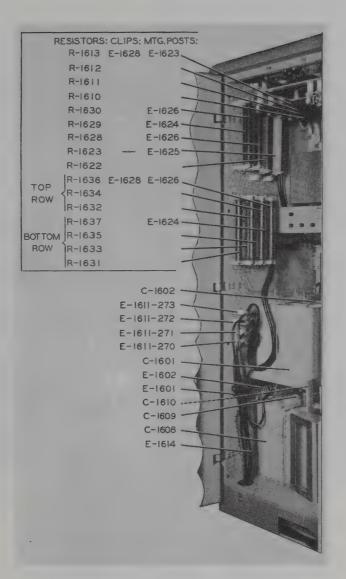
Power Supply Assembly PP-1089/FRT-22, Right-Side Cabinet Wall, Rear View.
